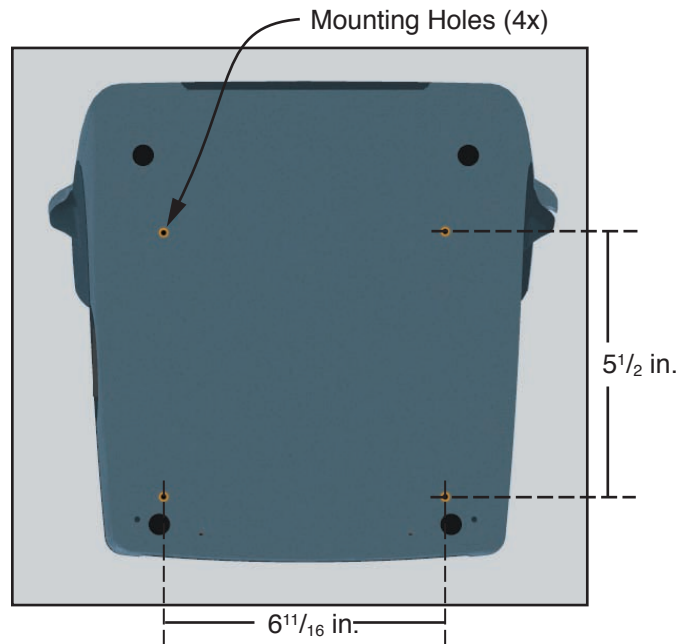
MOUNTING HOLES - The system can be mounted to a cart or table using the threaded mounting holes shown in this illustration. Use screws with a M5 x 0.8 thread and the appropriate length to extend through the surface of the table or cart.
